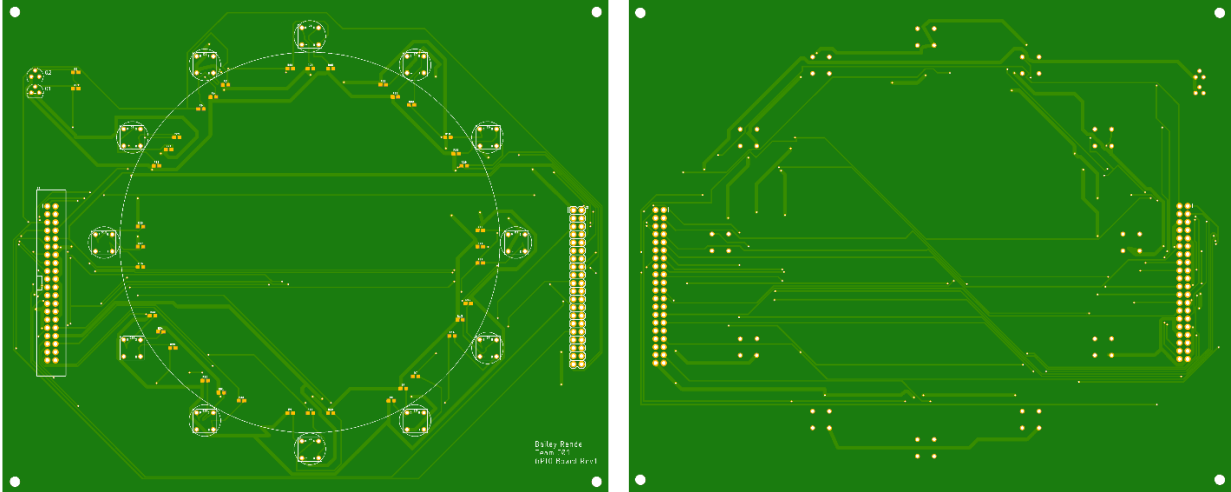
GPIO PCB top (left) and bottom (right) view
